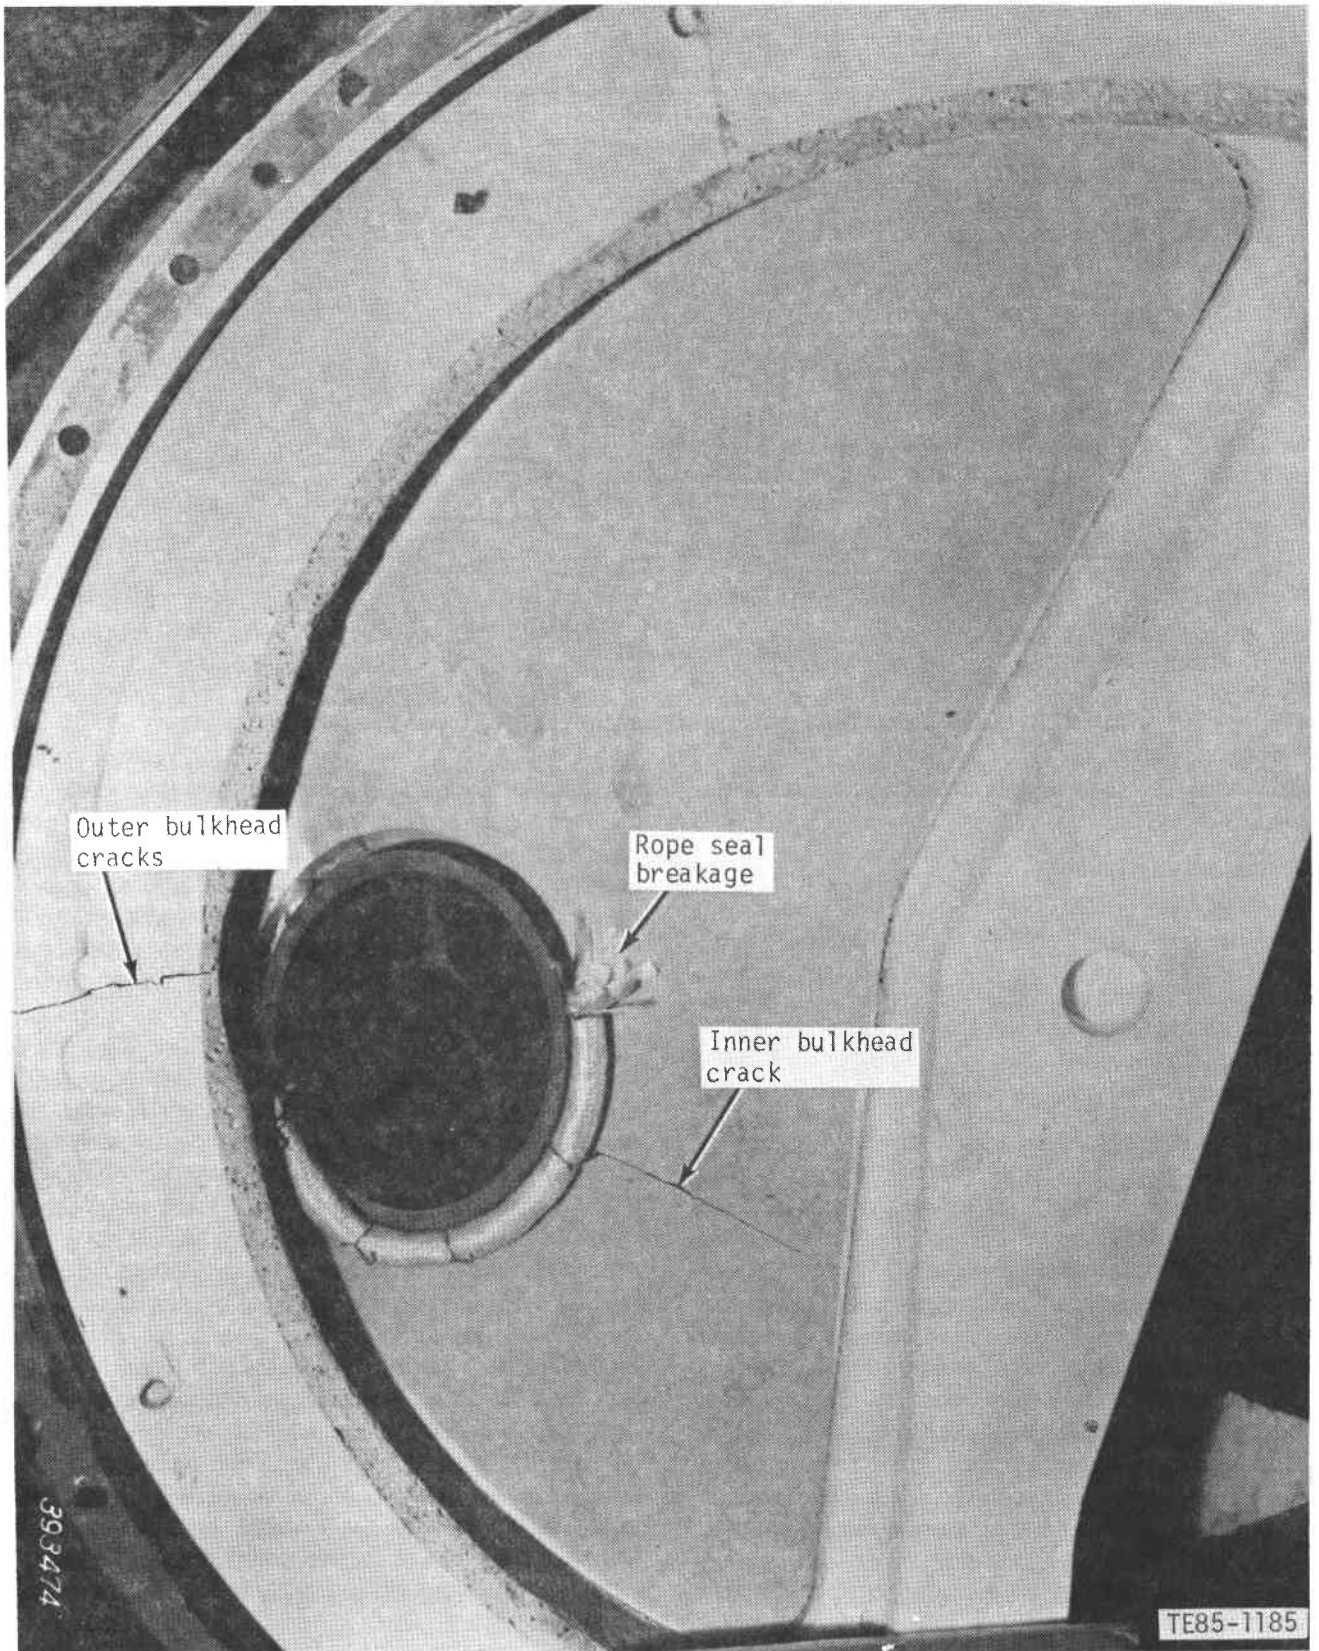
Scroll thermal shock rig ceramic bulkhead and rope seal failure.
